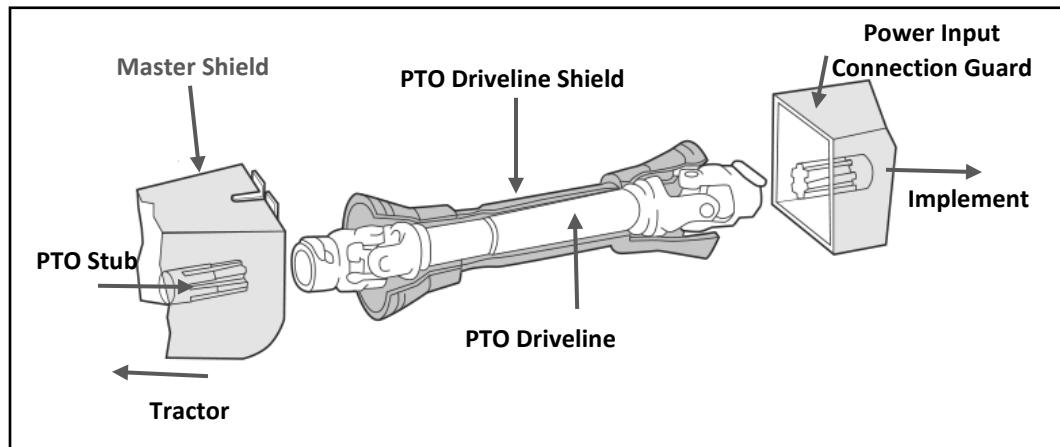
PTO drive shaft connecting tractor to implement, with appropriate guards and shields.
